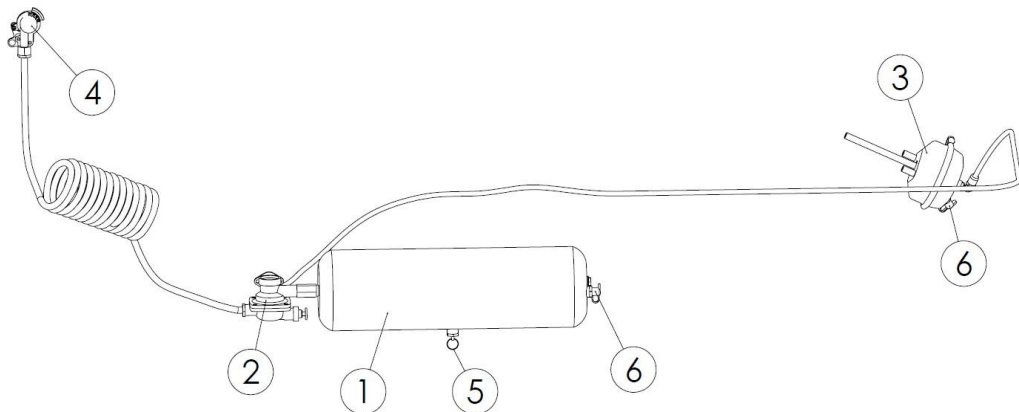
Single-line pneumatic brake system: 1 - air tank, 2 - braking valve, 3 - pneumatic actuator, 4 - hose connector, 5 - drainage valve, 6 - control connector
